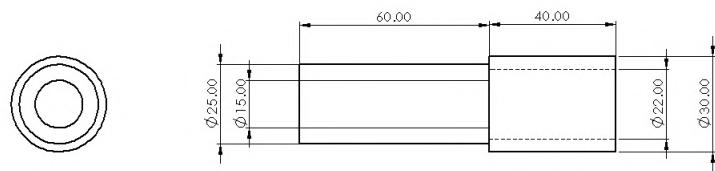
2D Drawing of the Ball Nut flange (All dimensions are in mm)
